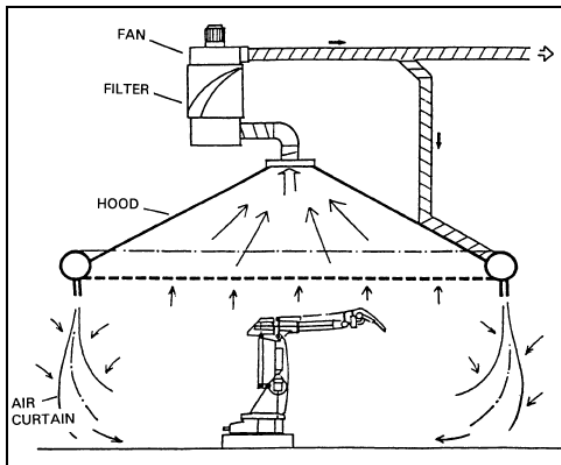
Push-Pull Hood over Welding Robot
